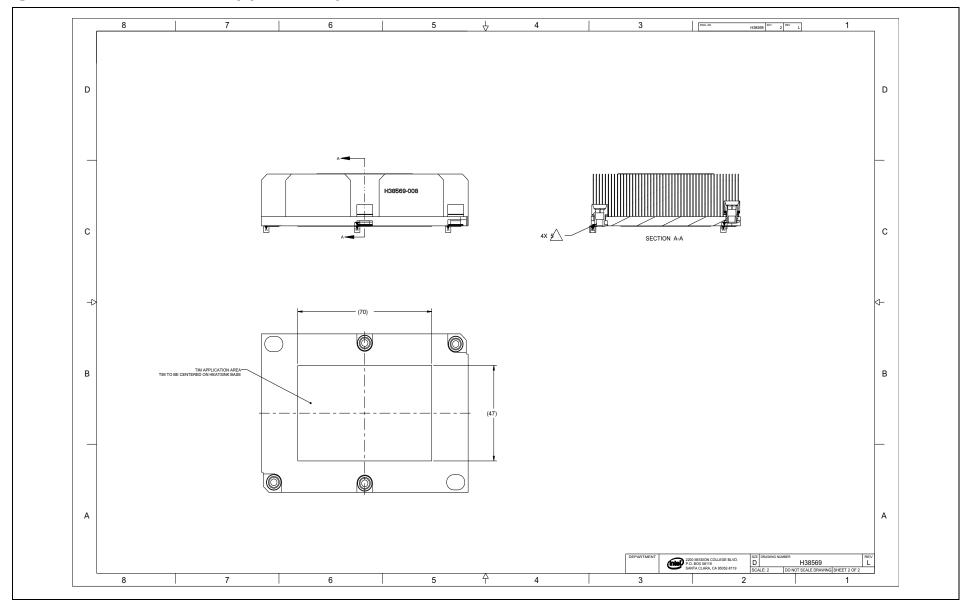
1U Heatsink (Sheet 1 of 2)
